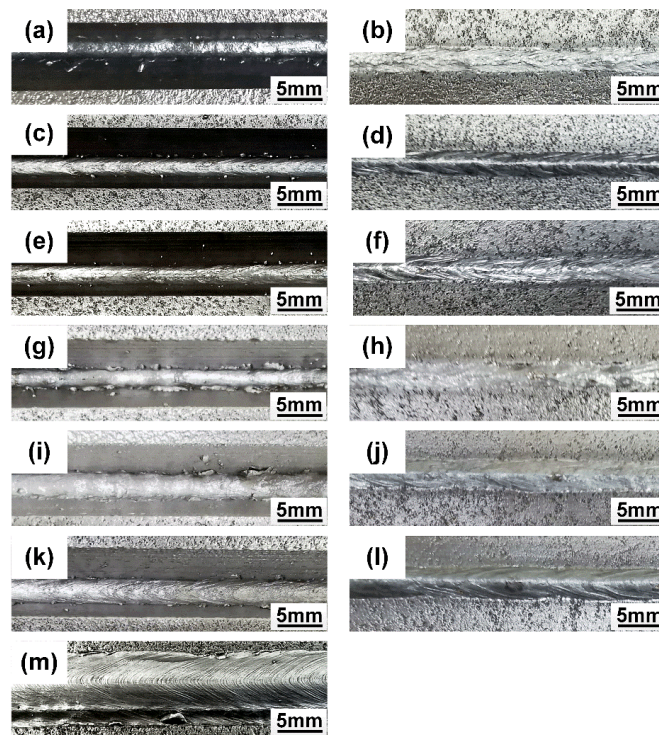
Weld surfaces morphologies: (a) and (b) top and bottom surfaces of autogenous laser weld; (c) and (d) top and bottom surfaces of cold-wire laser weld with a WFR of 4 m/min; (e) and (f) top and bottom surfaces of cold-wire laser weld with a WFR of 6 m/min; (g) and (h) top and bottom surfaces of hot-wire laser weld with a WFR of 6 m/min; (i) and (j) top and bottom surfaces of cold-wire laser weld with a WFR of 12 m/min; (k) and (l) top and bottom surfaces of hot-wire laser weld with a WFR of 12 m/min; (m) top surface of cap arc weld.
